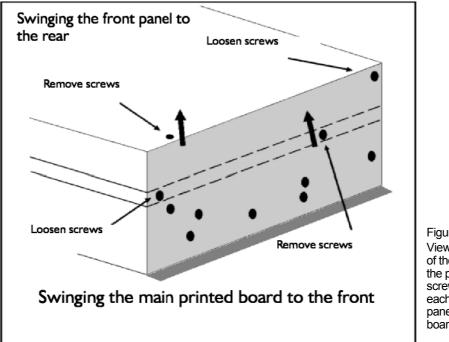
View of the right-hand side of the controller showing the position of the fixing screws: Two screws on each side hold the front panel and the printed board.
